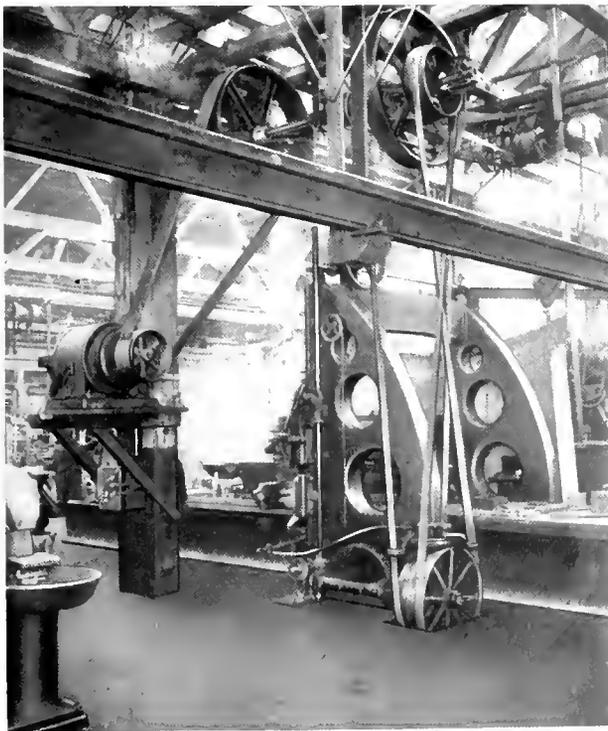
Planer, 72 in. by 22 ft., belt driven, by a 40 h.p. 1060 r.p.m. Compound Wound Motor
